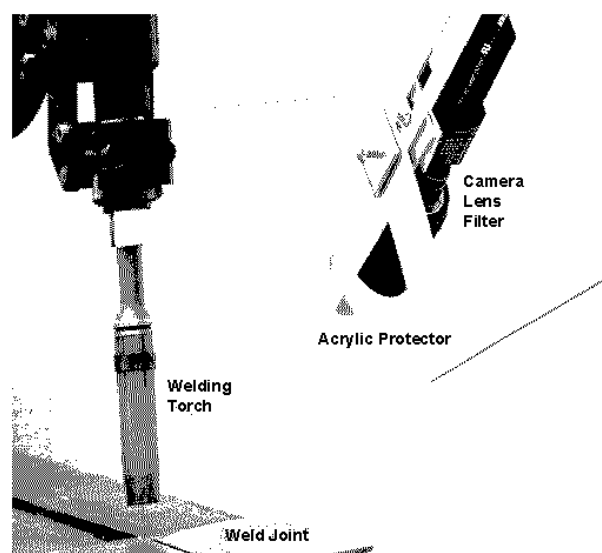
Final setup of the camera in relation to the welding torch.
